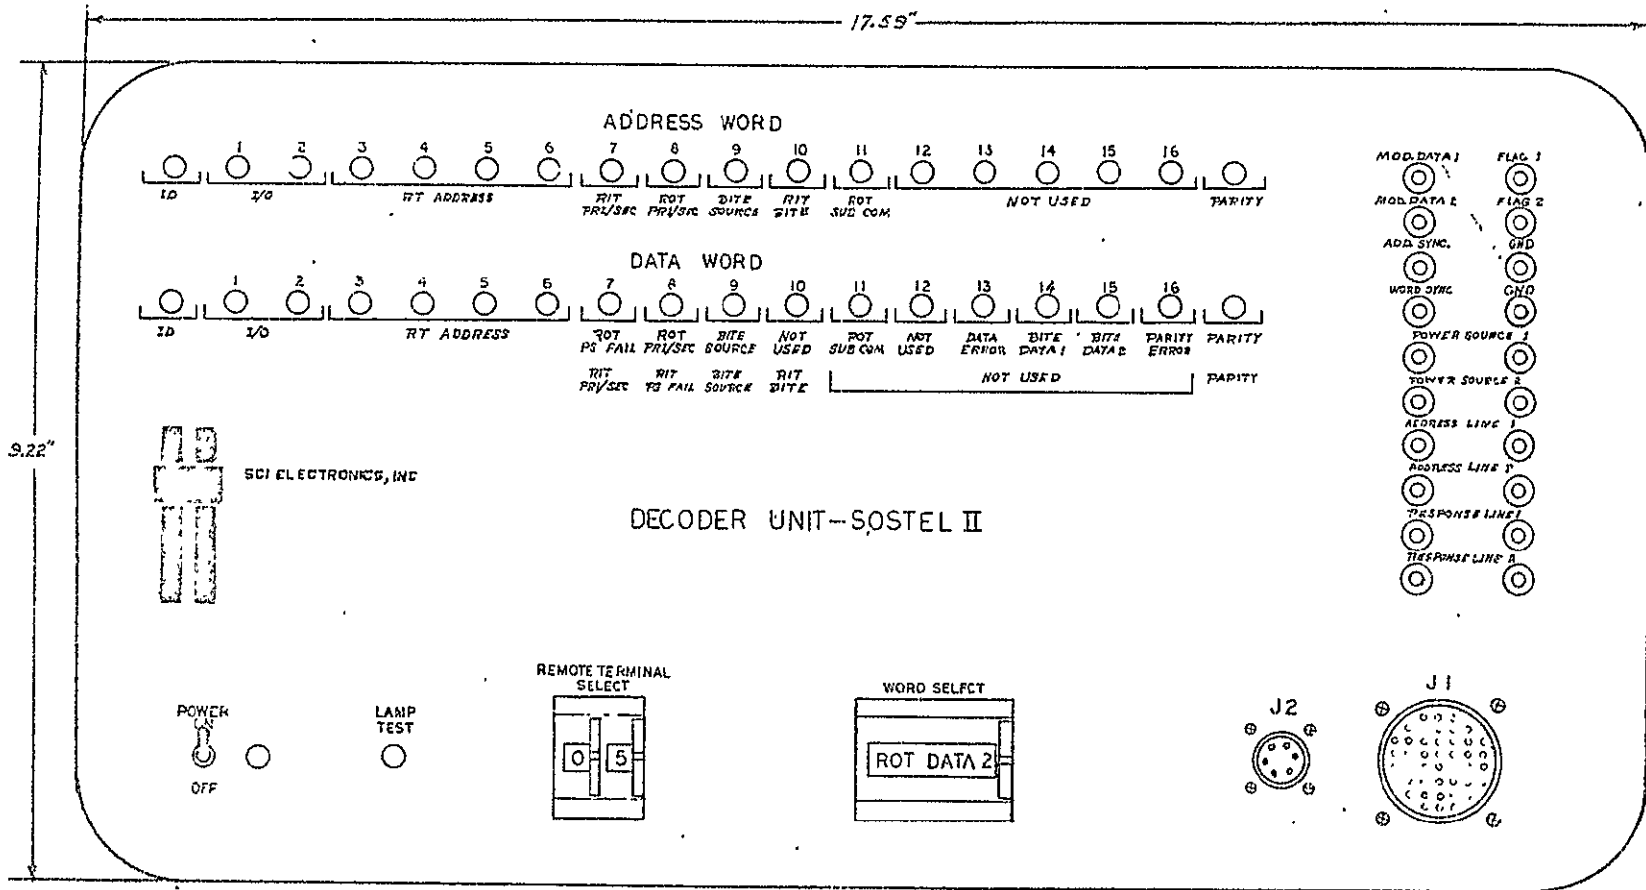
DECODER UNIT, PANEL LAYOUT
